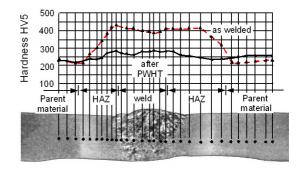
Hardness distribution in the T92 steel welded joints, as welded and after PWHT - 760°C/1,5h
